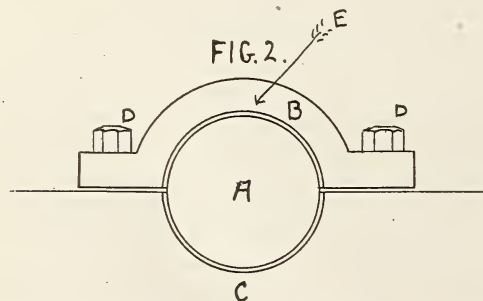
Cap bearing B has been sprung down around shaft A and arrow E points to spot where pressure is greatest on cap bearing.
